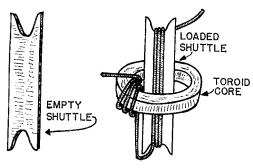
Details of a hand-winding system suitable for toroid inductors of medium or large dimensions. At A, a home-made winding shuttle fashioned from a piece of stiff cardboard or fiber insulating board. The sketch at B shows how the wire is wound on the shuttle (see text) and passed through the toroid core, again and again, until the winding is in place. The turns should be evenly spaced around the circumference of the form, maintaining uniform spacing between turns. Multi-layer inductors can have their turns close-wound and over one another.
